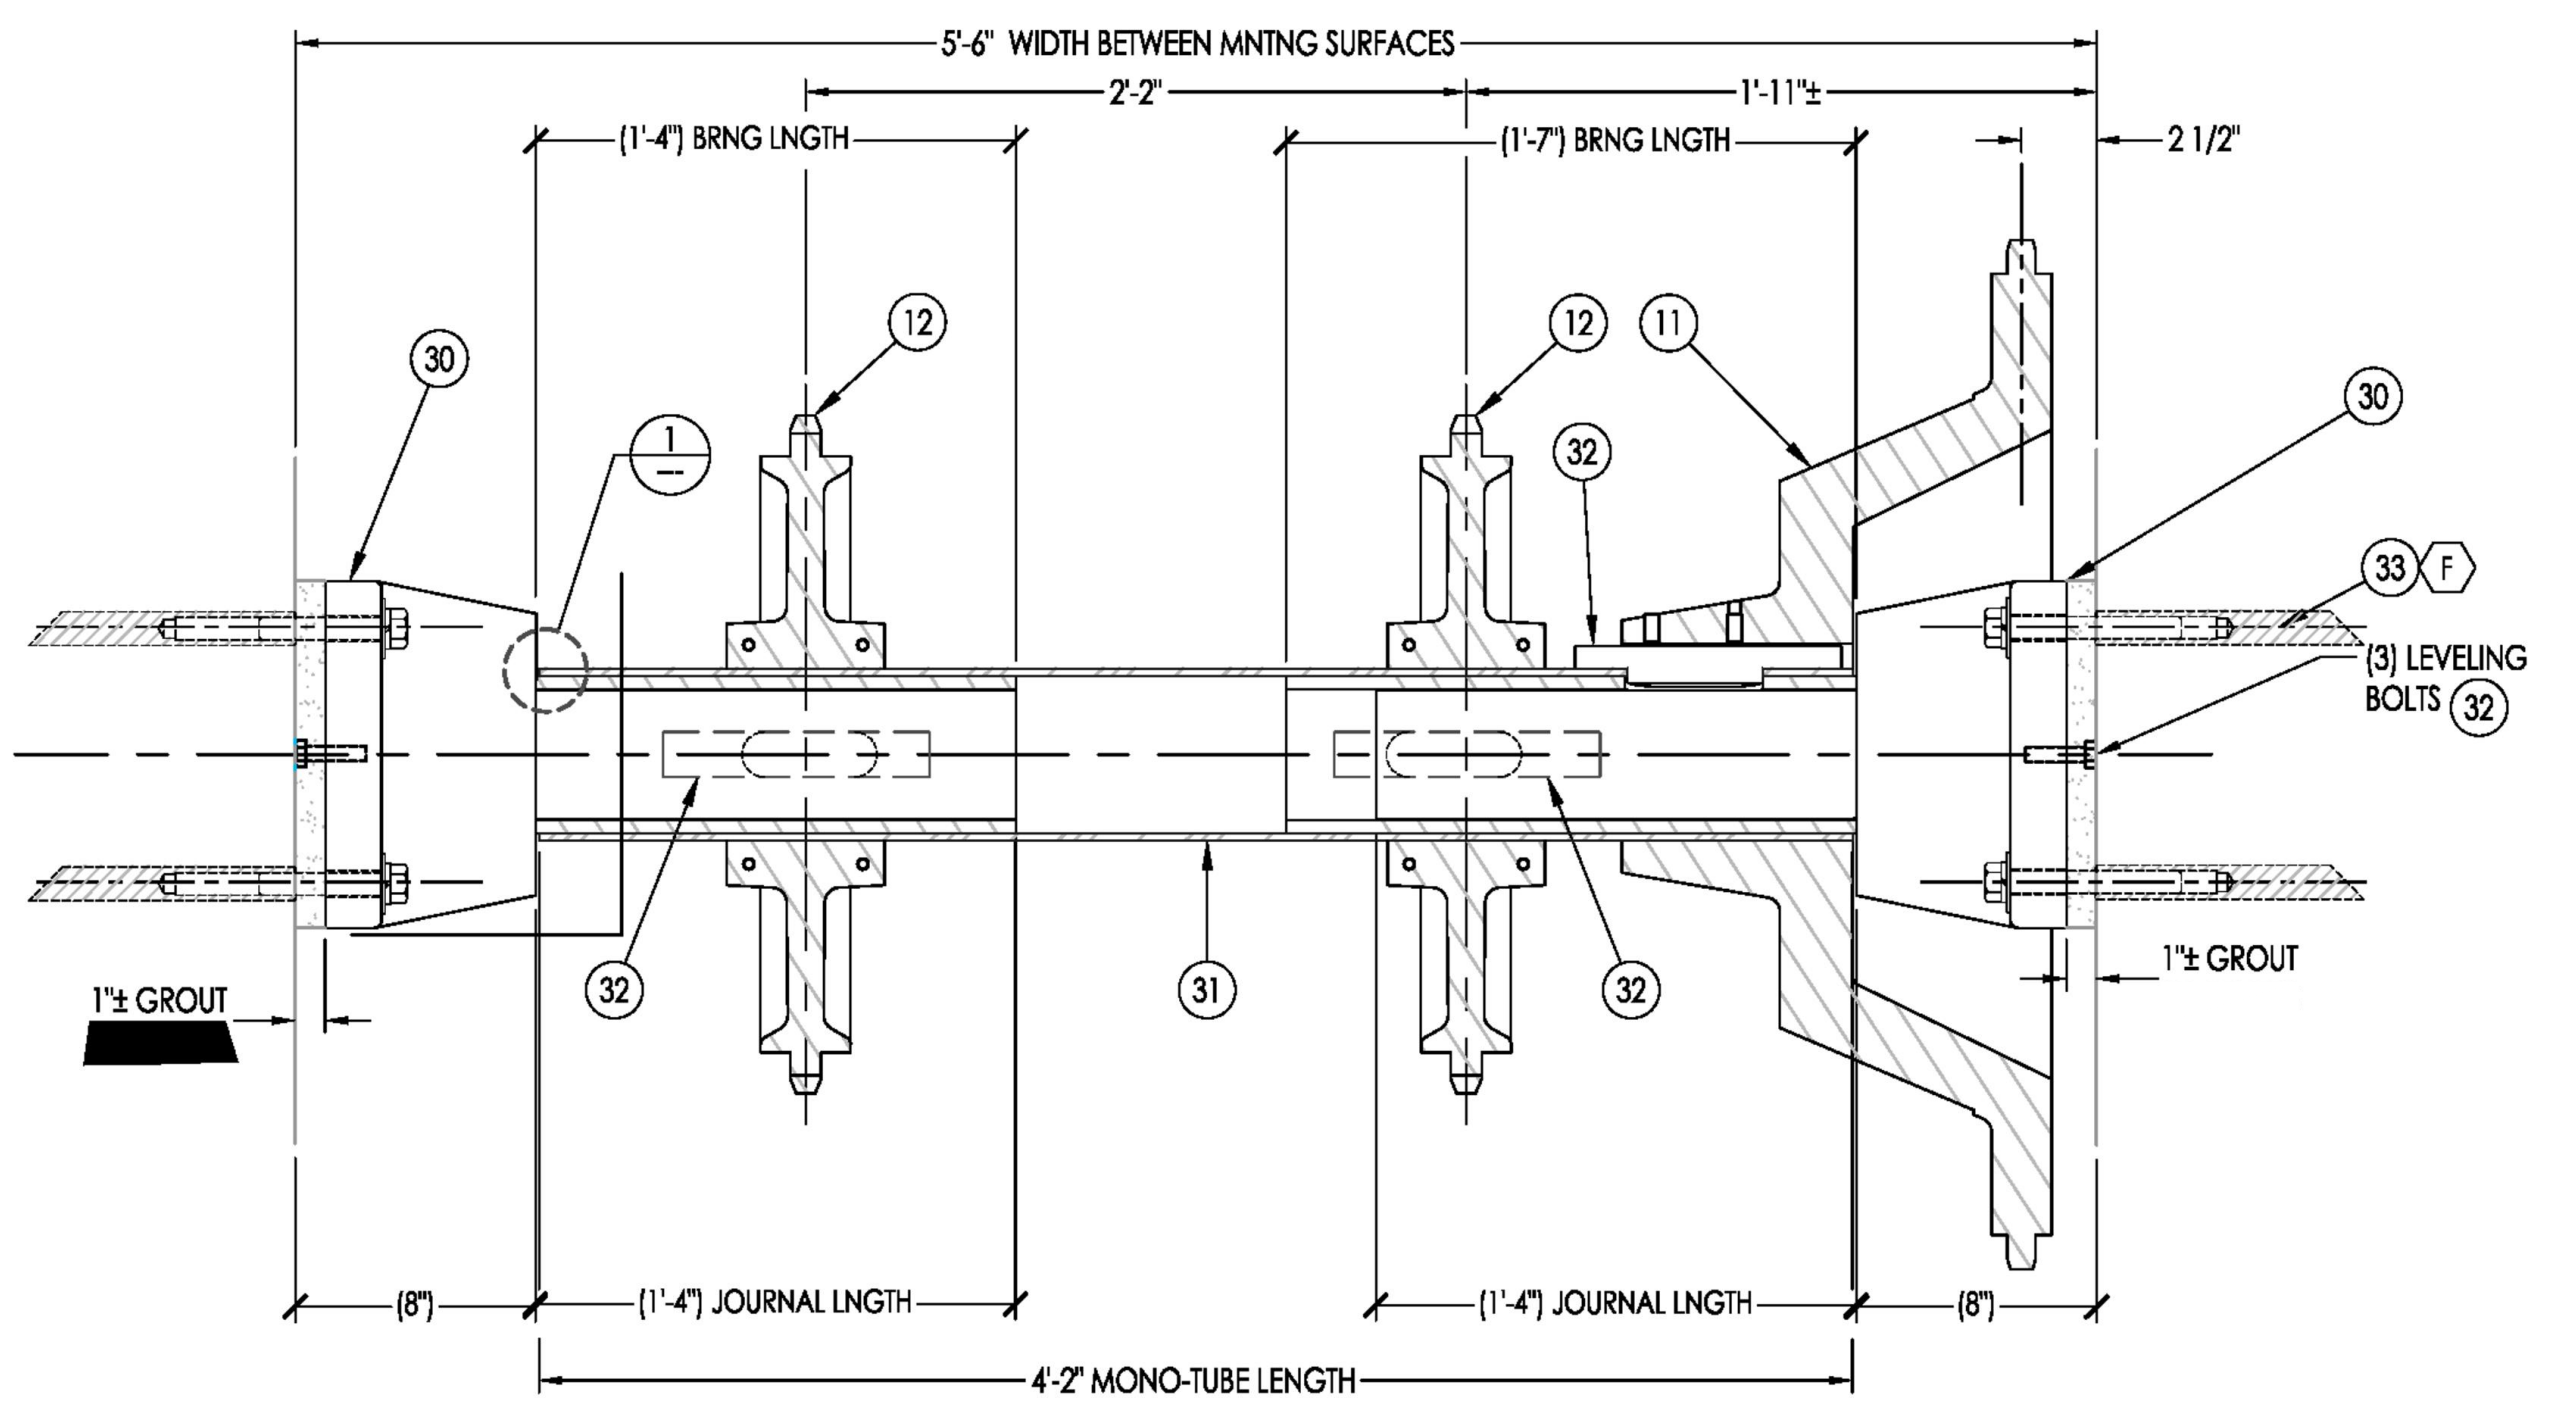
DETAIL SHEET: LONGITUDINAL HEAD SHAFT
